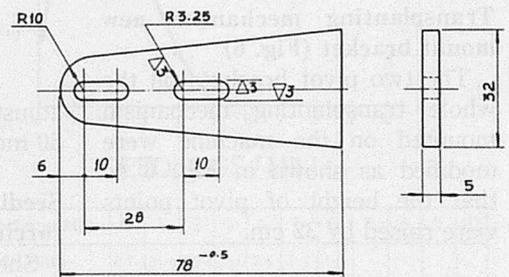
Modified Seedling Fork Mounting Bracket (Quantity Req. 6, Material M.S.)
